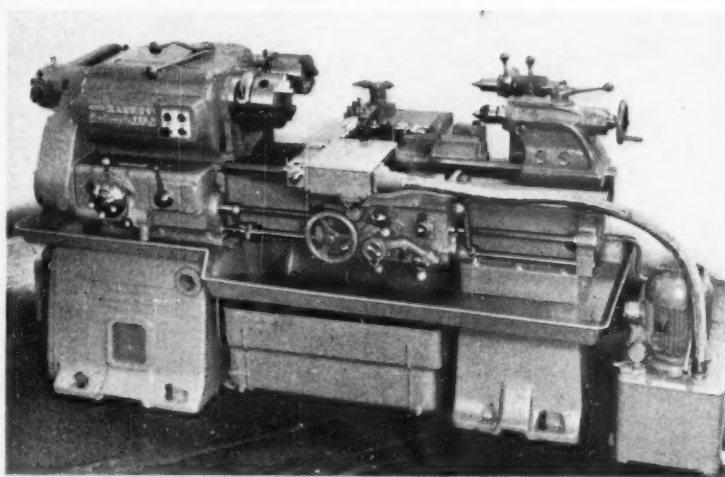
Maxново Profilomatic 350-22 rotating-master hydraulic copying lathe for operations on dies and moulds
